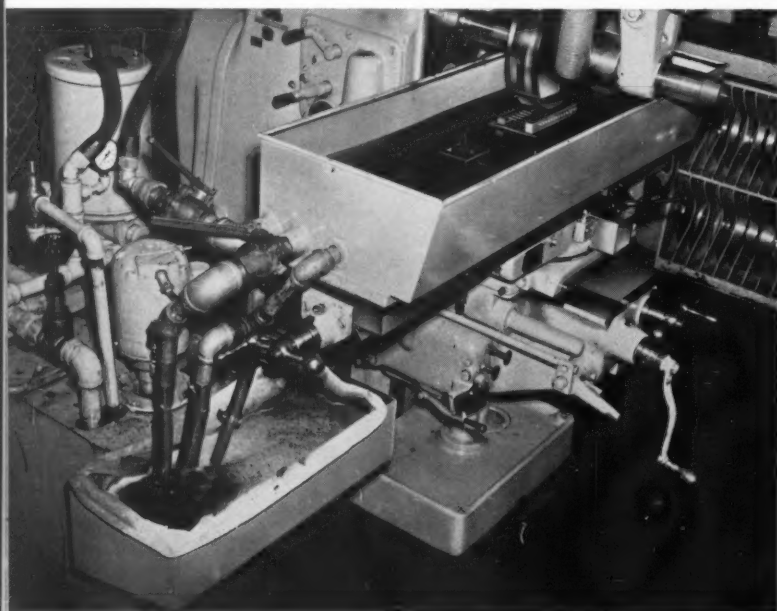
During electrical discharge machining, the tools being formed and the lower part of brass wheel are submerged in transformer oil.
